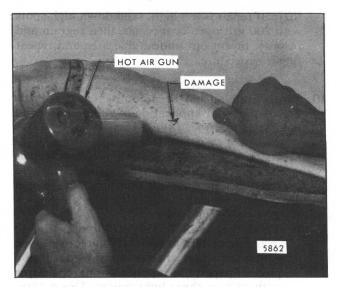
Separating Roof Cover from Foam Pad - Heat Application
